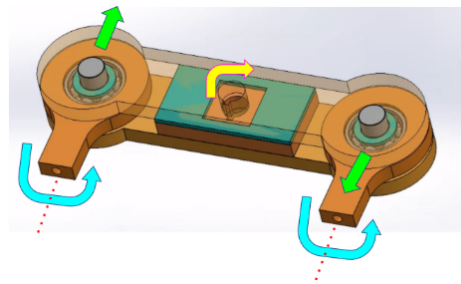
As twister rotates, pivot pieces stay in line with the j-hooks mounted to the wing heave mount
